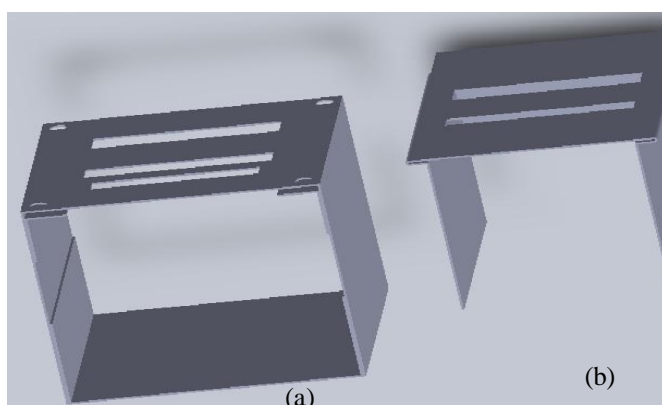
Fixture Block : a) Fixed Block b) Slider Plate
